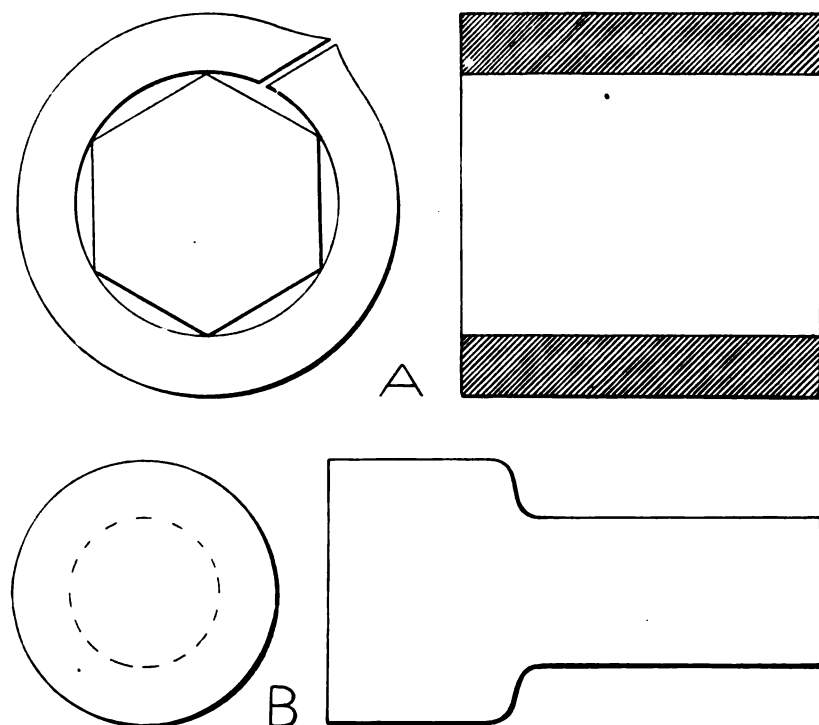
CONVENIENT METHOD OF MAKING LARGE WRENCHES.
